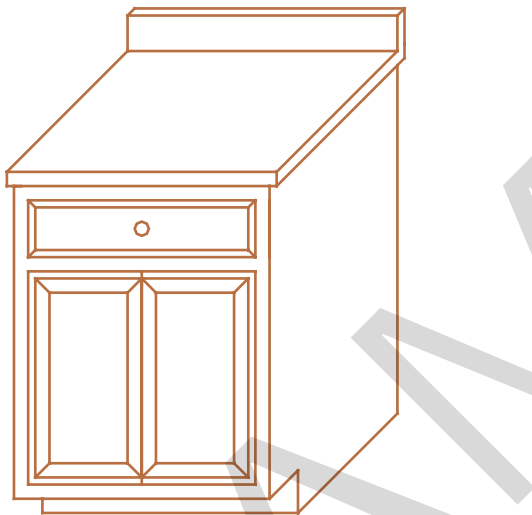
Objects that are most detailed in the front view are often drawn as oblique drawings.
